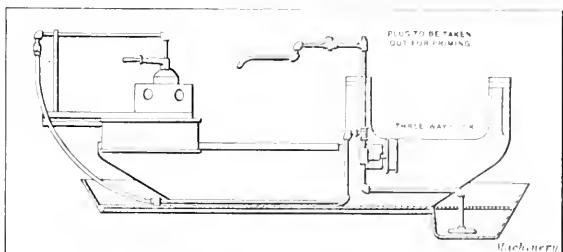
Lubricating Arrangement of Bardens & Oliver Turret Lathe
